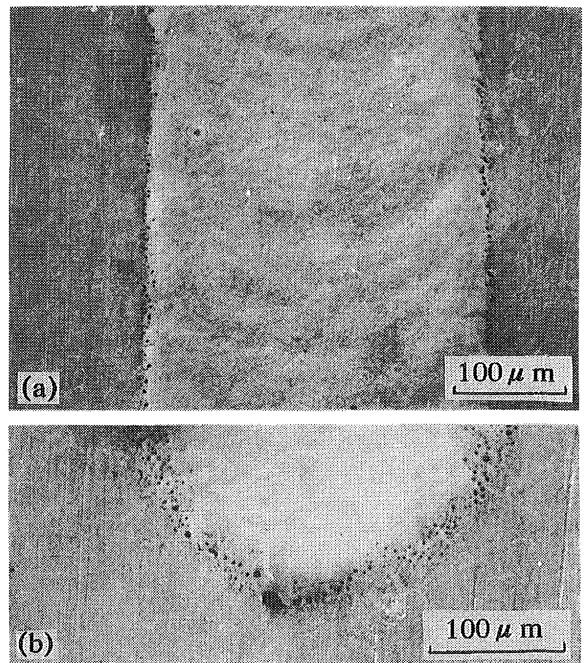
Surface appearances of YAG laser weld. Power 50W, Travel speed 1.3×10^{-2} m/s, (a):Bead center area, (b):Bead start area
